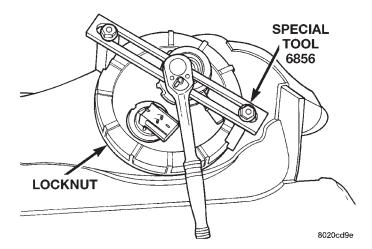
Fuel Reservoir Module Lock Nut Removal
